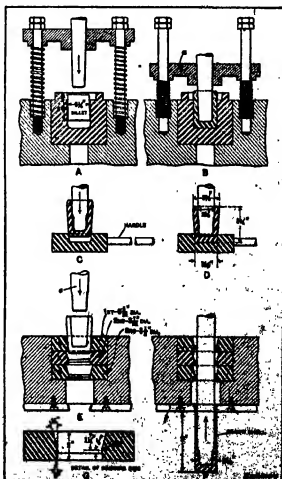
Diagram illustrating Holinger process of making shrapnel forgings in hydraulic forging presses.
